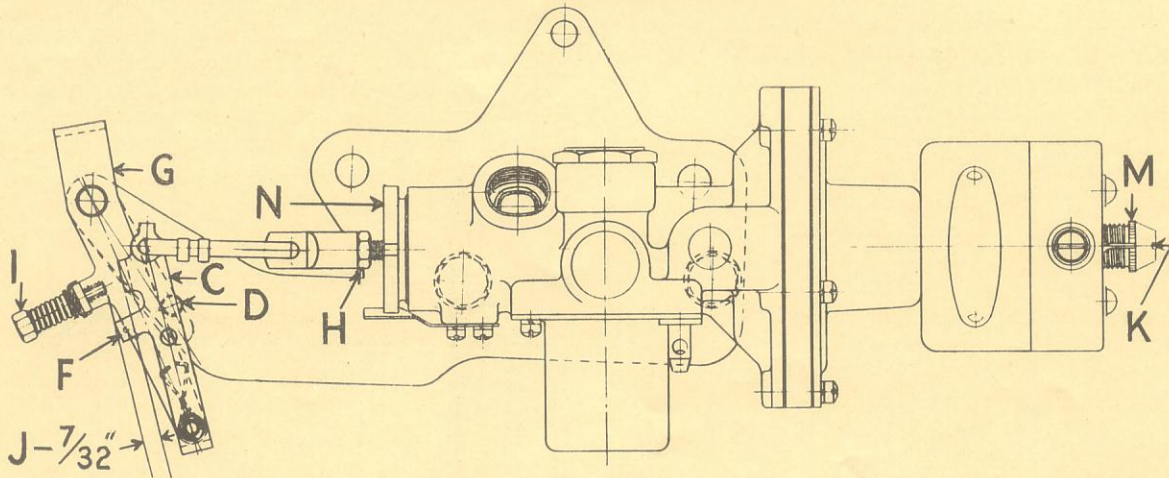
Electromatic Clutch Control Valve showing principal points of adjustment.
